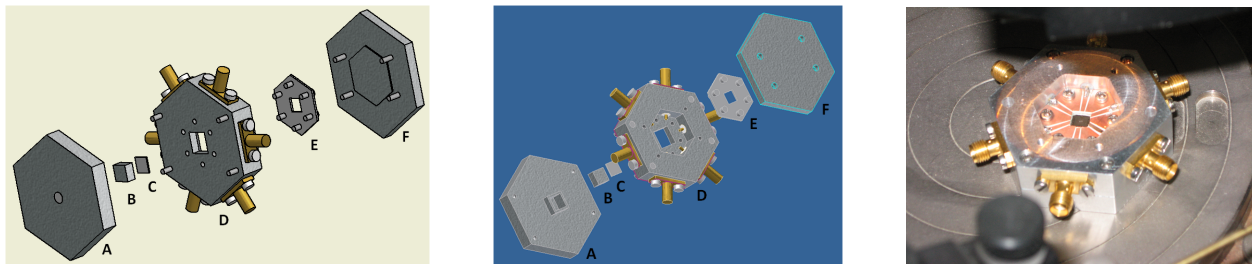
Sample holder picture and illustrations form two points of view including the following parts: A. base; B. aluminum plate; C. chip; D. Main part containing 6 SMA connectors; E. PCB ; H. cover
